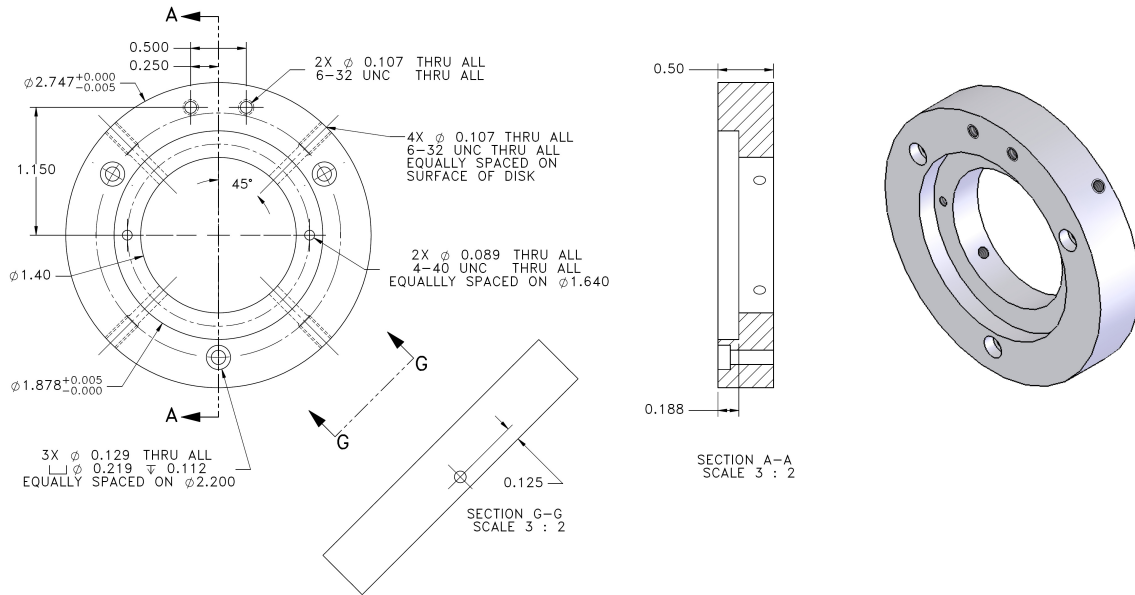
Technical drawing of the RFA front disk. All measurements are in inches
